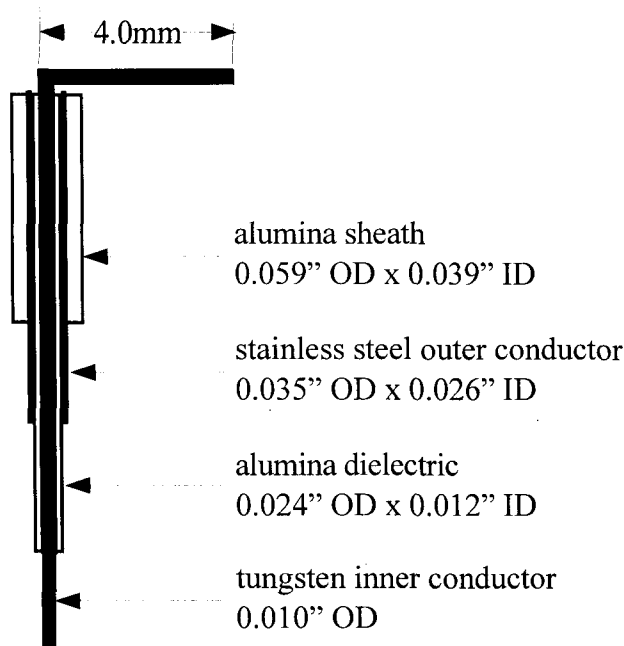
Cut away view of end of RF plasma probe, not to scale. The alumina sheath is 25cm long. The exposed tungsten is treated with a tesla coil to remove sharp edges.
